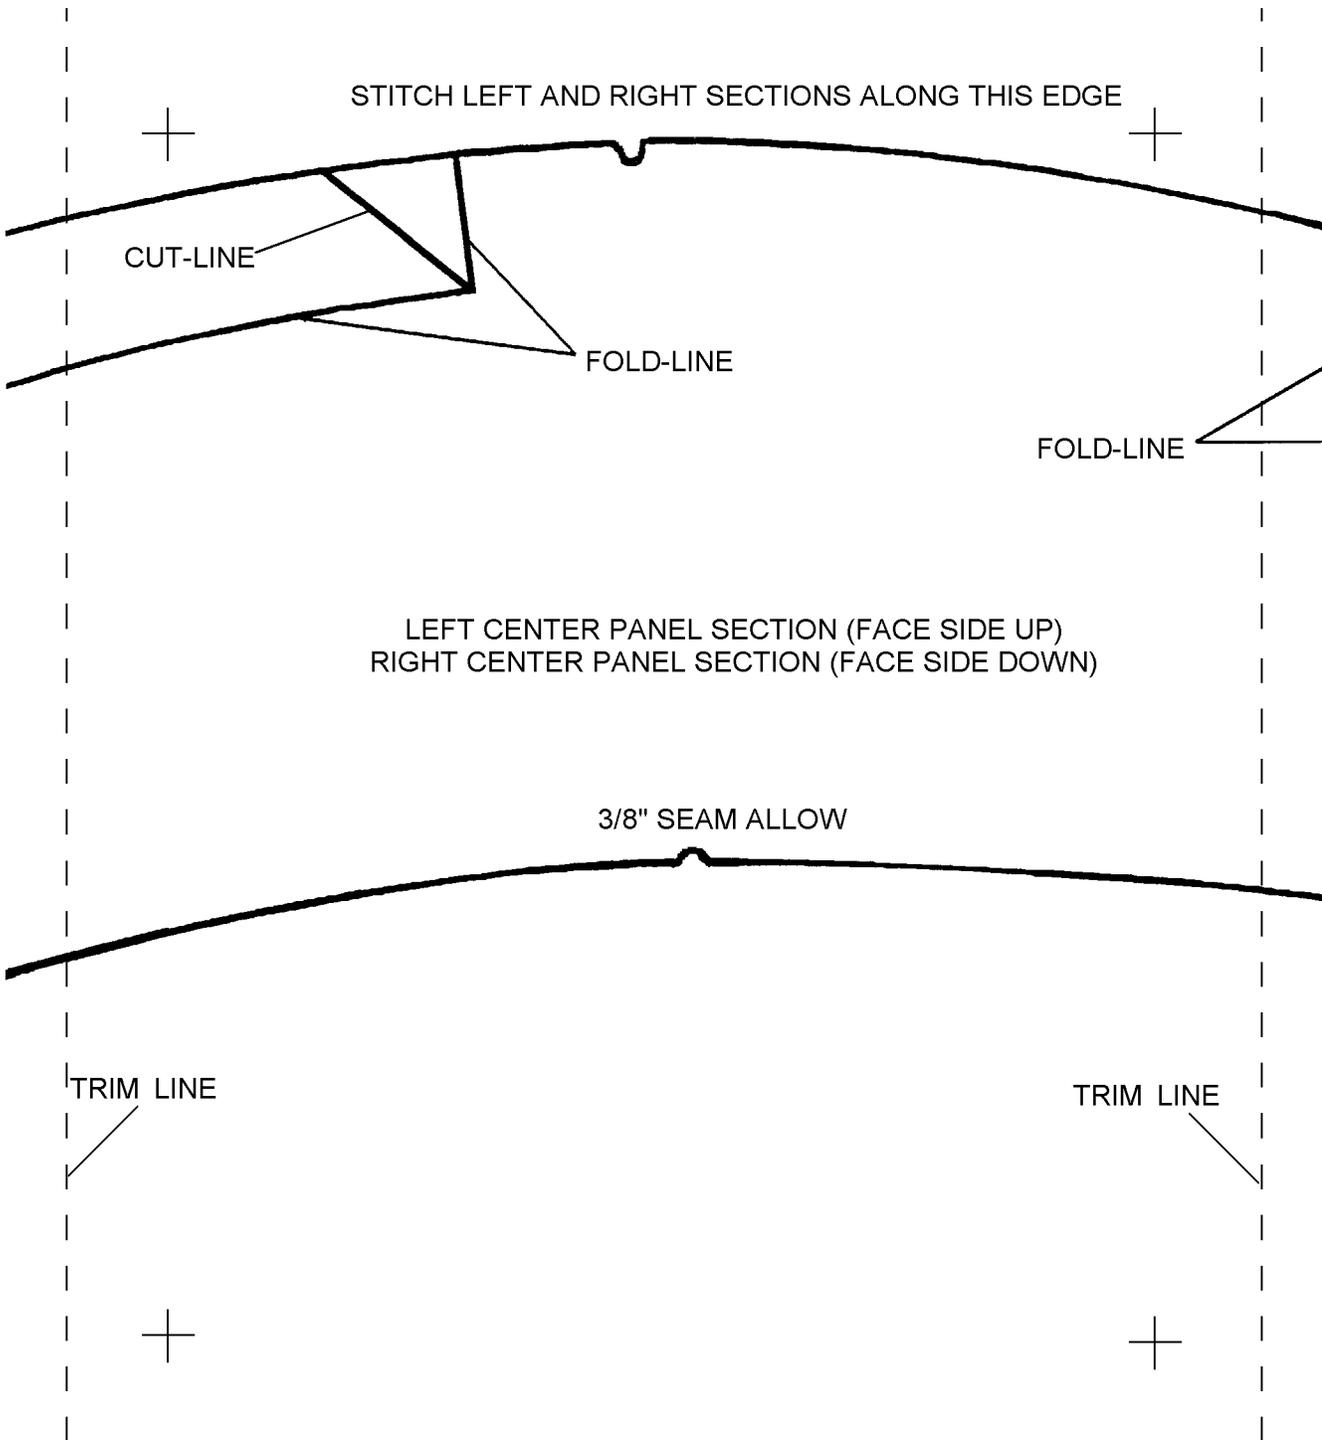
Removable Camouflage Helmet Cover (Medium) (2 of 5)
